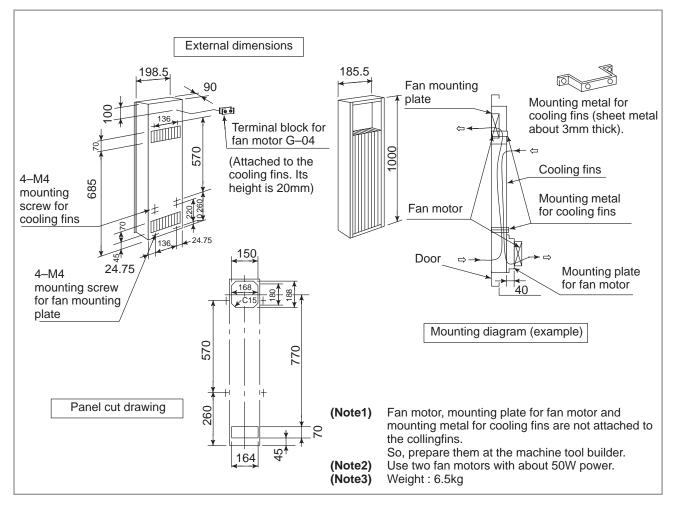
(b) External dimension and mounting method of cooling fin A (02B-0053-K303)
